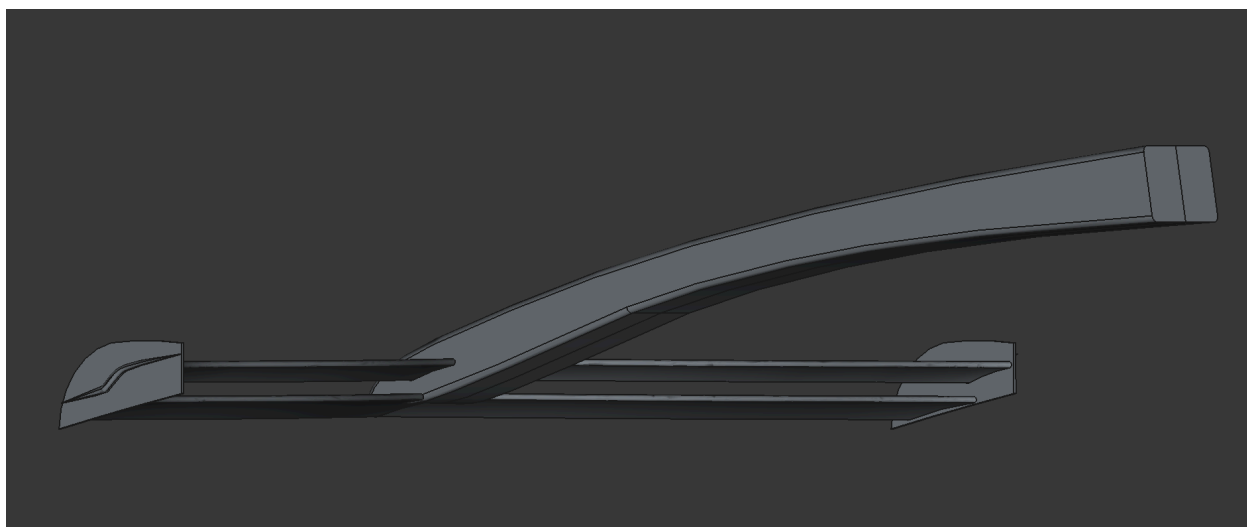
Close up view of distance between tip of Front Wing and Nose Cone
